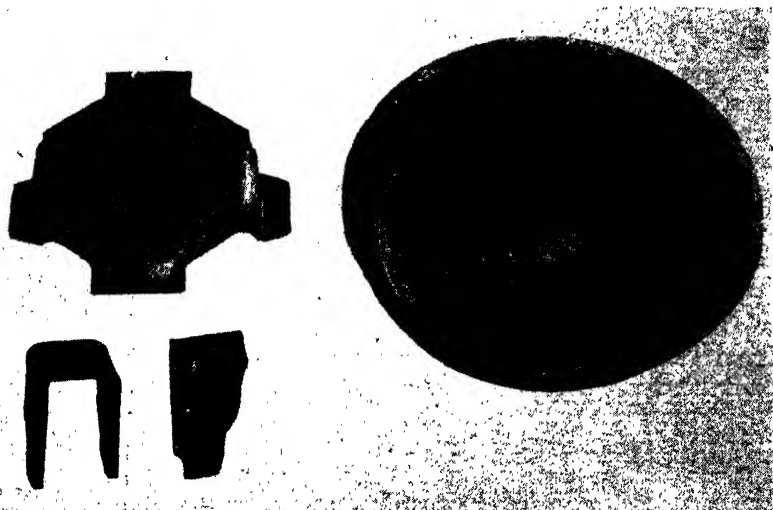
Parts cut for pressing or shaping. The bowl was a 38-in. disk cut from $1\frac{1}{2}$ -in. plate and pressed hot. The other parts are irregular shapes cut from $\frac{3}{4}$ -in. plate. (Courtesy of R. G. LeTourneau, Inc.)
